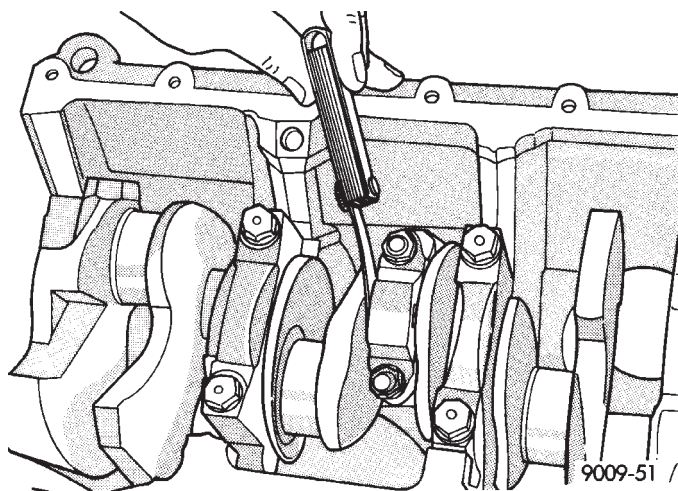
Checking Connecting Rod Side Clearance—Typical
